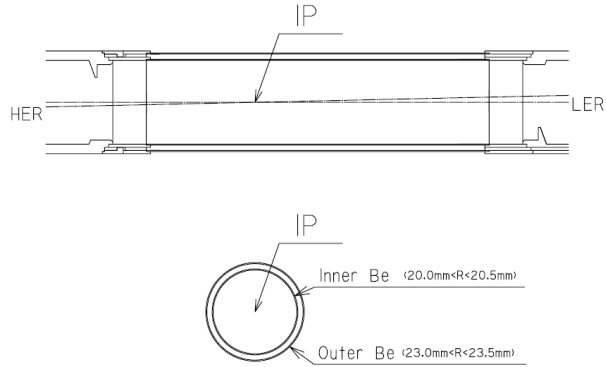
The cross-section of the beam pipe at the IP [25].
